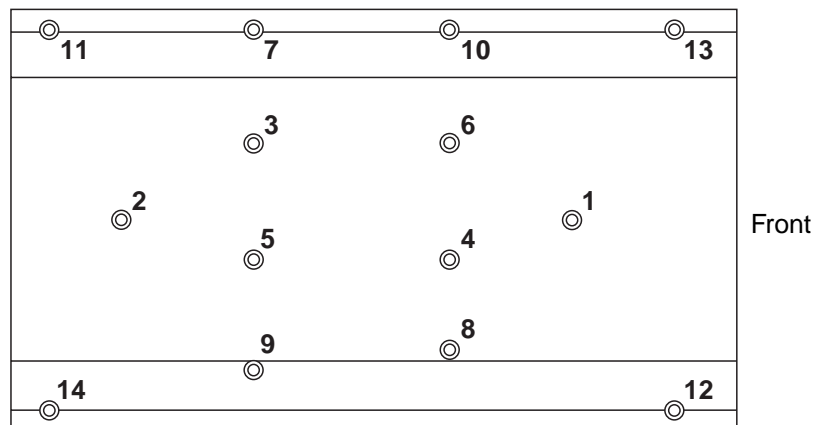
Receiver/Transmitter Bottom Cover Screw Tightening Order
